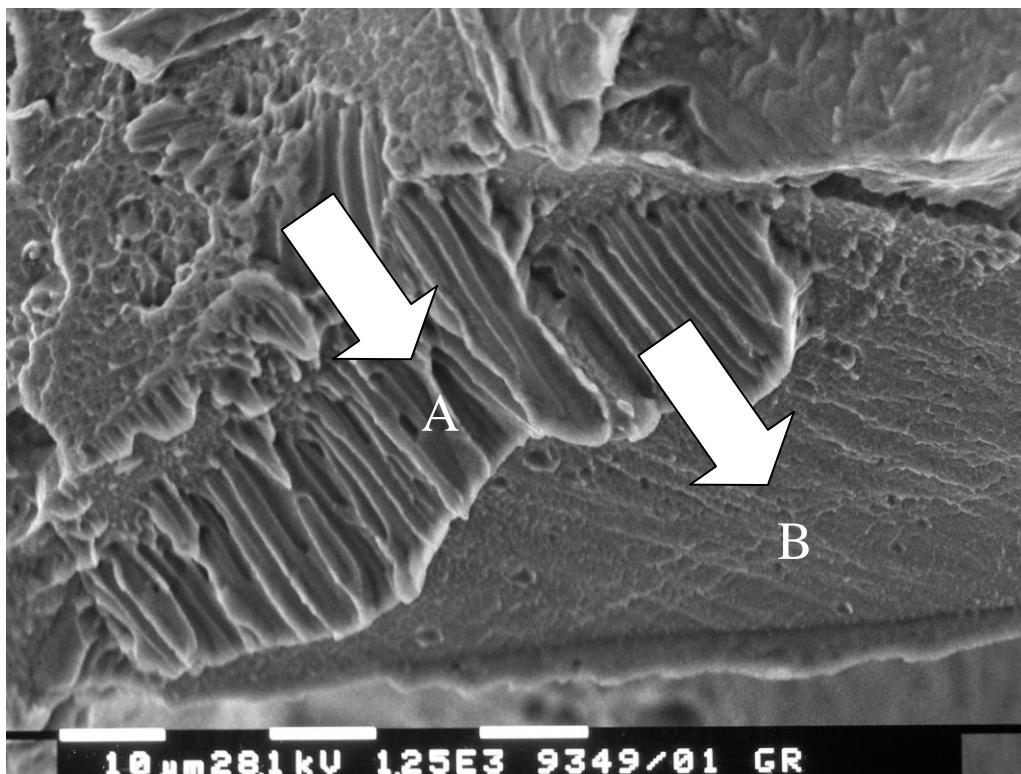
Fracture surface in the ending zone (as Fig. 5d)
